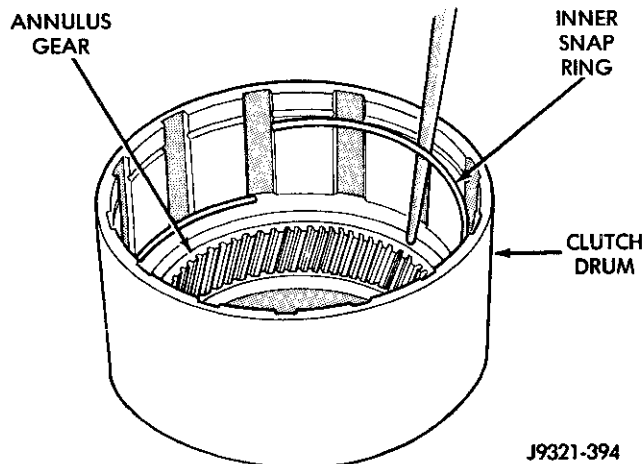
Clutch Drum Inner Retaining Ring Installation
